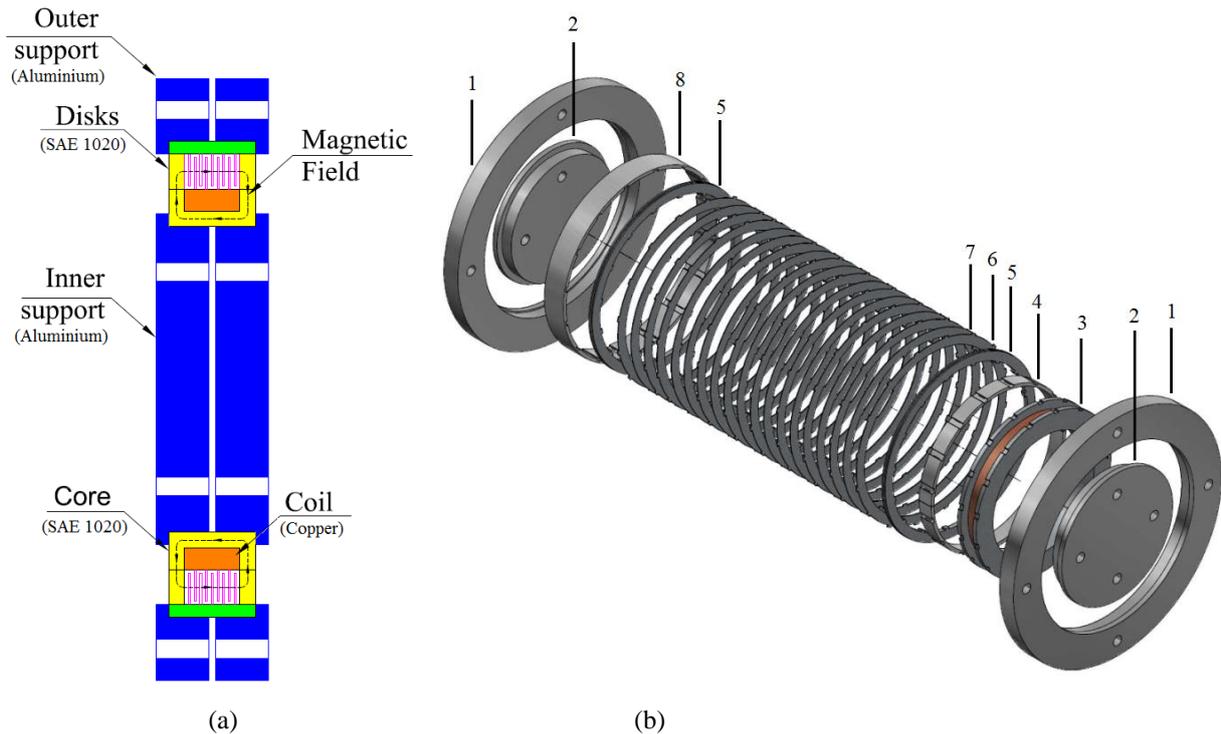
MR clutch. (a) Schematic view. (b) Exploded view of the MR clutch with supports for performance test.
